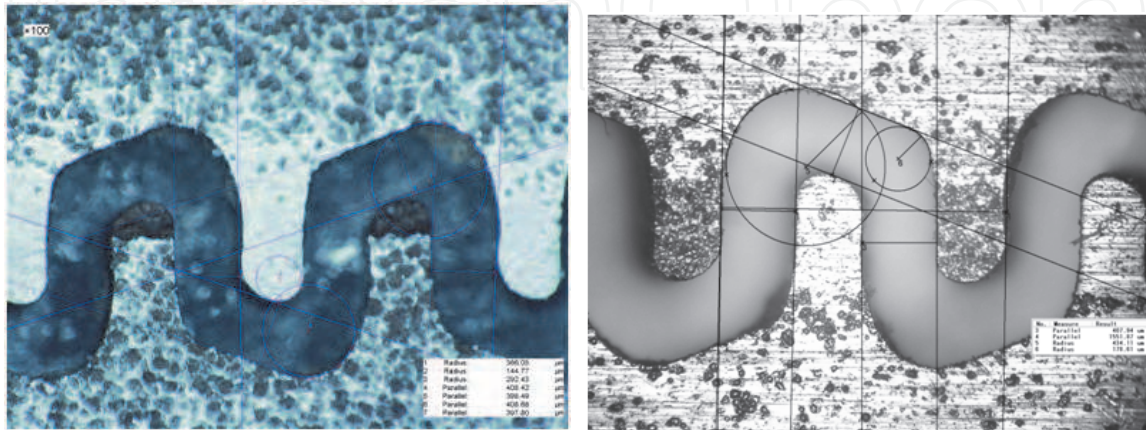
Accuracy measurement of helical sample under wire-cutting process
